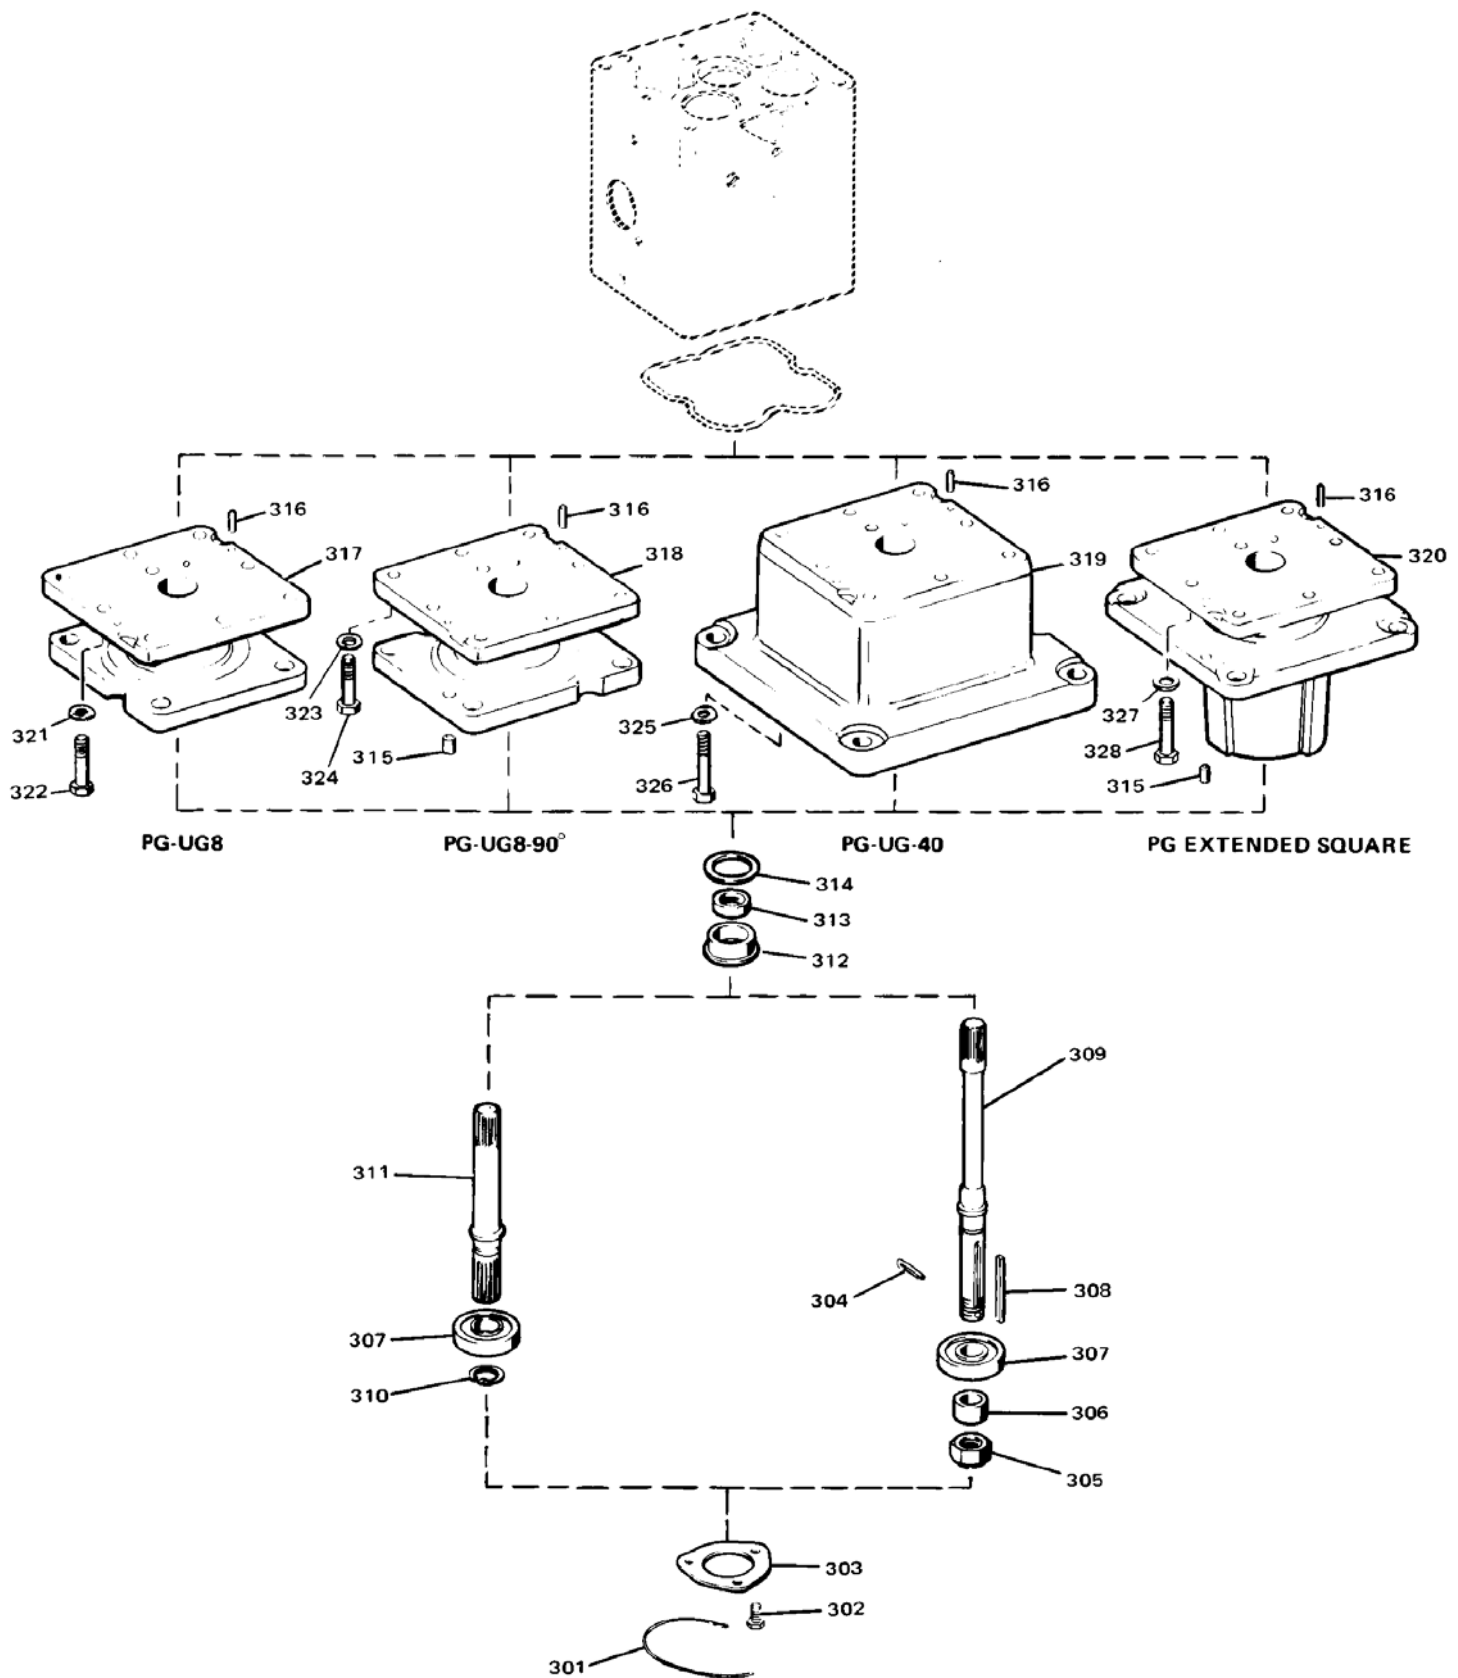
Exploded View of PG/UG-8, PG/UG-8-90°, PG/UG-40, and PG Extended Square Bases
